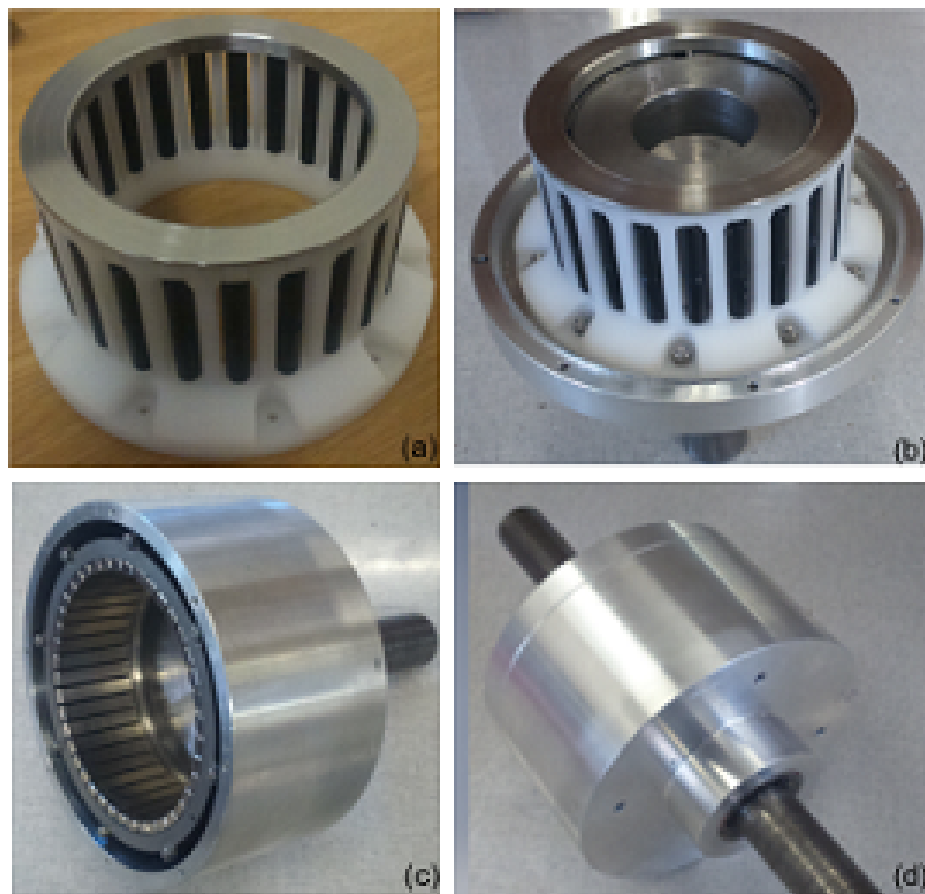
Magnet planetary gear prototype with (a) Carrier with stainless steel support ring, (b) Carrier and HS assembly, (c) LS and low speed casing assembly and (d) full gear assembly [29]
